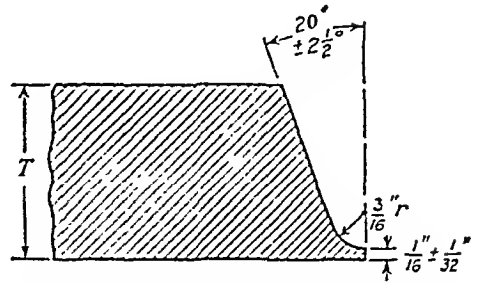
RECOMMENDED BEVEL FOR WALL THICKNESSES (T) AT END OF FITTING, GREATER THAN 3/4 IN. BUT NOT GREATER THAN 1 1/4 IN.
